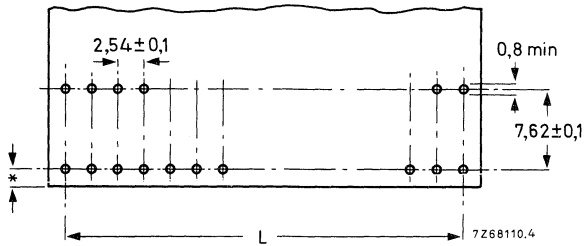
Hole pattern for board edge sockets. See Table 1, pages 8 and 9 for dimension L. The dimension marked * is determined by customer application (min. 2 mm).
